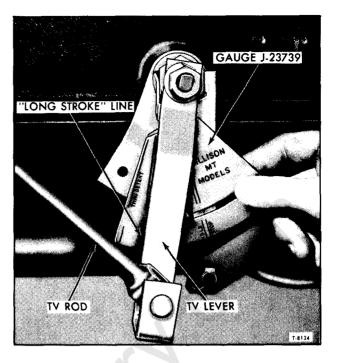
Checking For Proper TV Linkage Adjustment at Full Throttle
